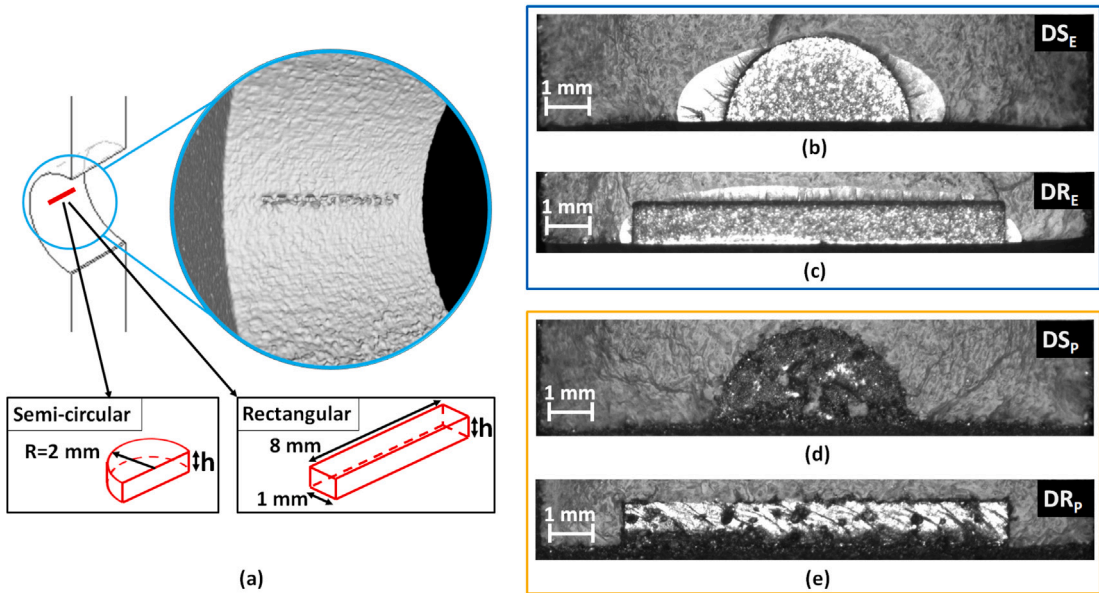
Three-dimensional defects on B3D benchmark specimens: (a) example of printed defect and scheme of semicircular and rectangular 3D defects; fracture surfaces of the specimens after testing for (b) a semicircular EDM defect, (c) a rectangular EDM defect, (d) a semicircular printed defect and (e) a rectangular printed defect. For the EDM defects, it is possible to see the fatigue pre-cracking on the fracture surfaces.
